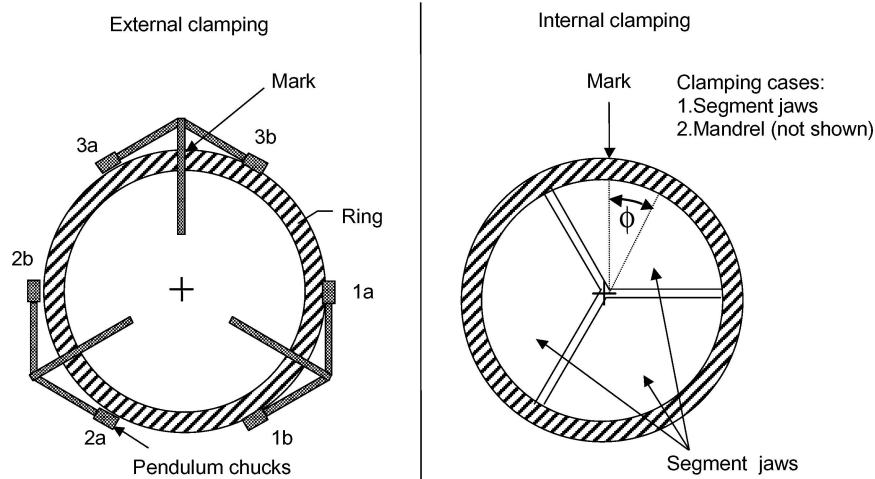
Illustration of the clamping apparatus for machining of rings [3].
